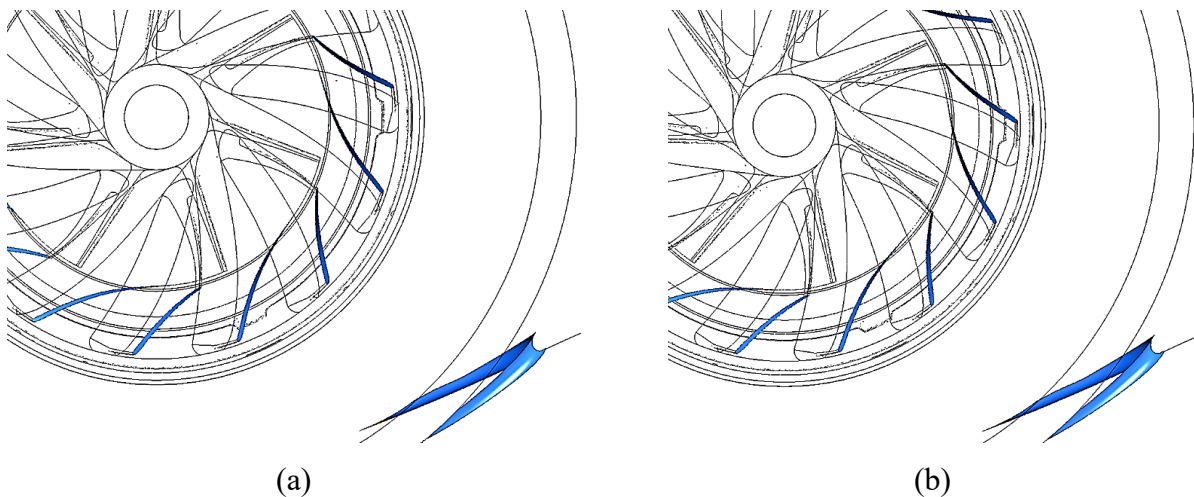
Two instances of impeller blade with respect to volute tongue (a) impeller blade aligned with volute tongue (b) volute tongue between two impeller blades
